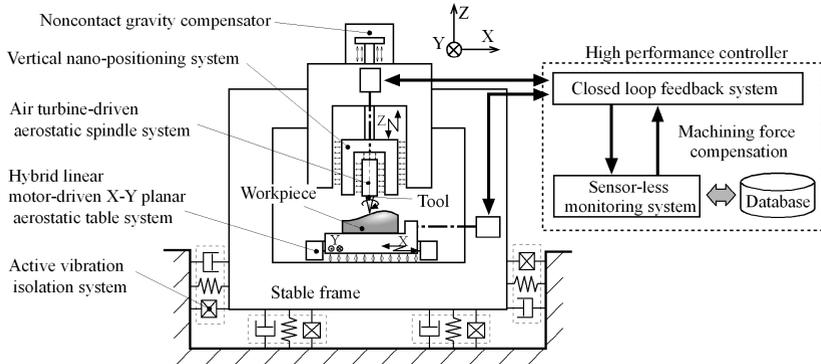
Design concept of the developed ultraprecision machine tool “ANGEL”
